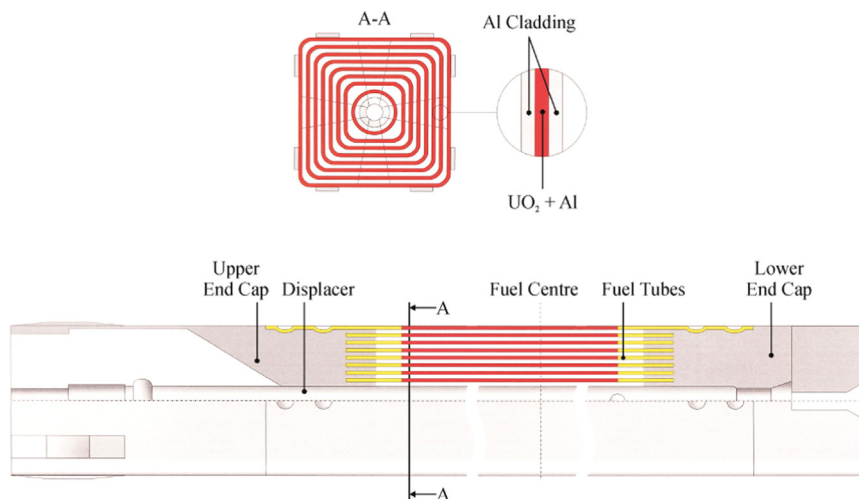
IRT-4 M fuel assembly (eight-tube modification).
